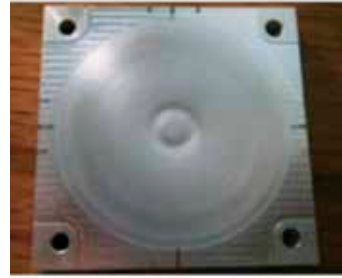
Bottom half of compression mold for preform design with uniform target thickness = 0.010 inch.
